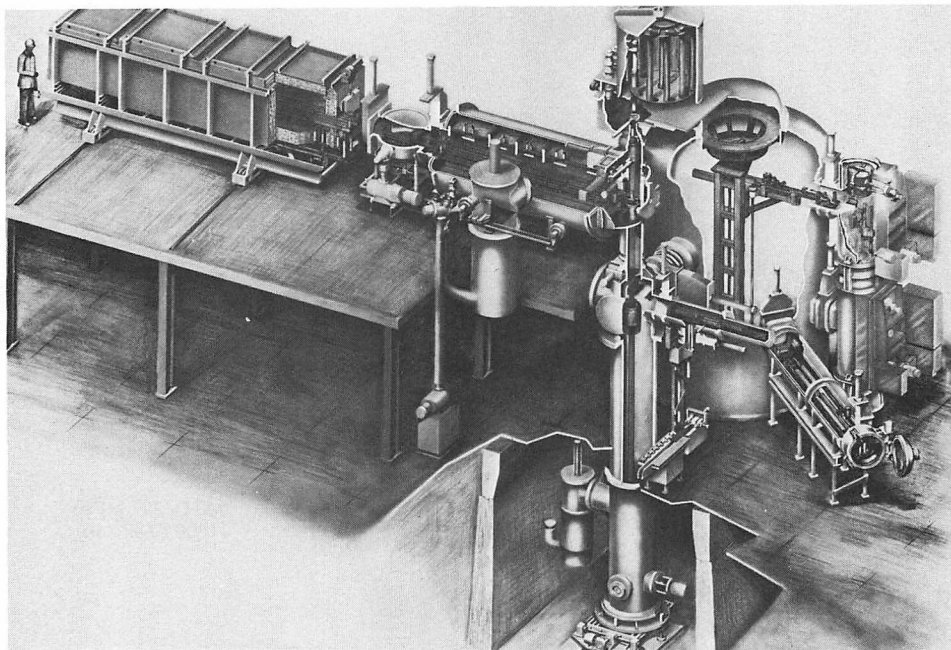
Casting unit of Pratt and Whitney Aircraft automated casting facility. It consists of an air electric preheat furnace followed by a vacuum preheat furnace where individual molds are preheated prior to entering the alloy melt chamber. After the molten alloy has been poured into the mold, it is passed by an elevator and a manipulator into the solidification chamber. Following solidification, the mold is transferred to a cooling chamber.
